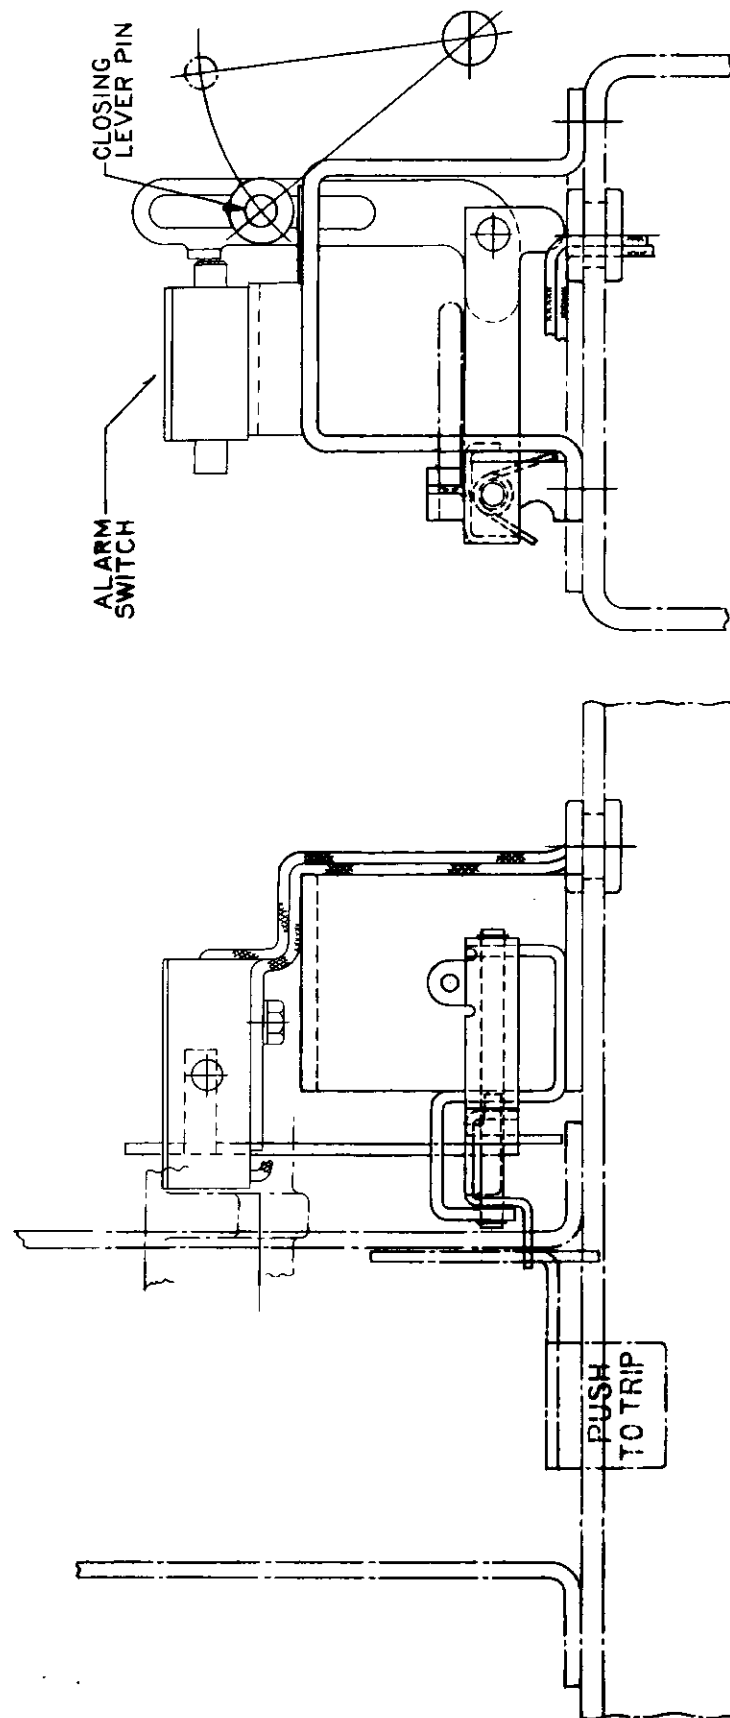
ALARM SWITCH ATTACHMENT - CONSTRUCTION DETAILS
